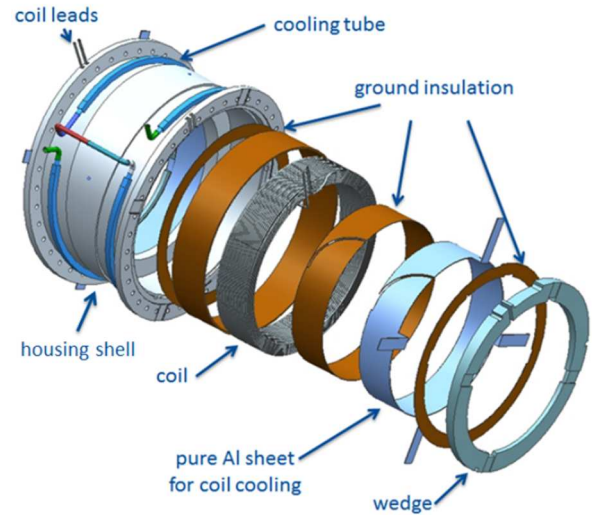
TS coil module prototype with the main components of one coil pulled apart and out of the module to highlight these components.
